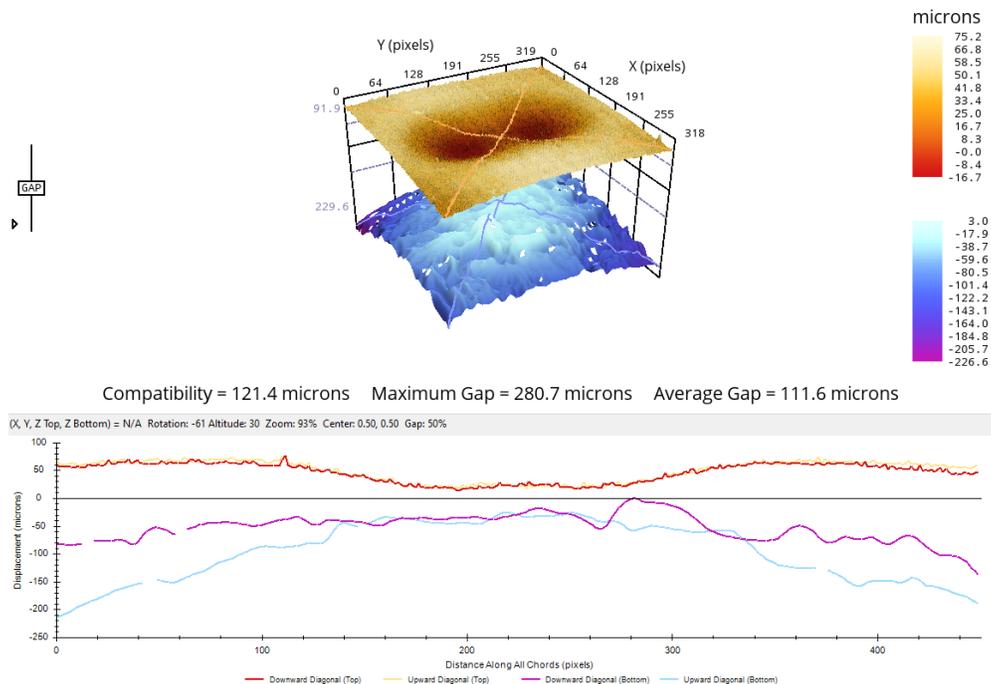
Solder Liquidus (220°C) Interface Analysis between Smaller BGA 1 and PCB 1 – ROI 2
